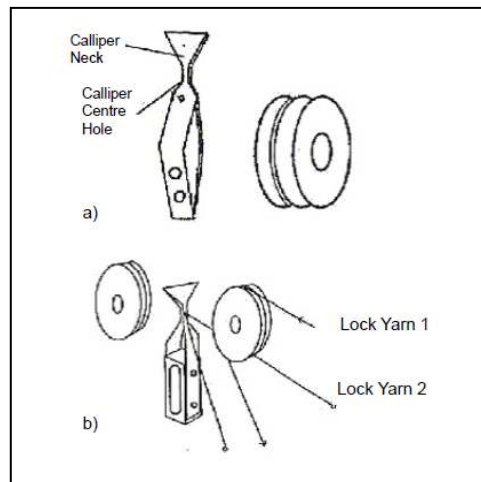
a) Caliper and Plywood devices, b) Caliper and plywoods location [8].
